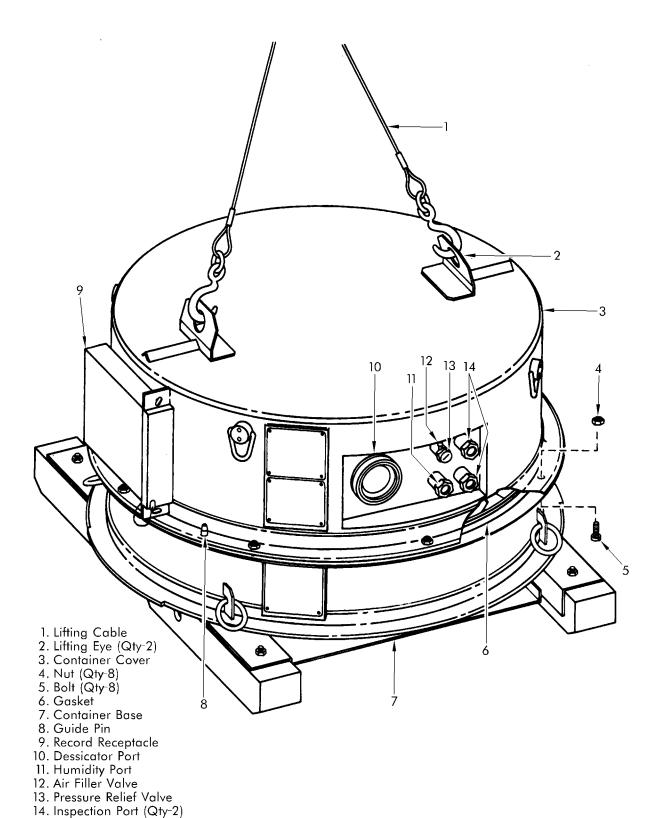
Accessory Section Module Shipping and Storage Container 21C7301G01; Removal and Installation of Cover
